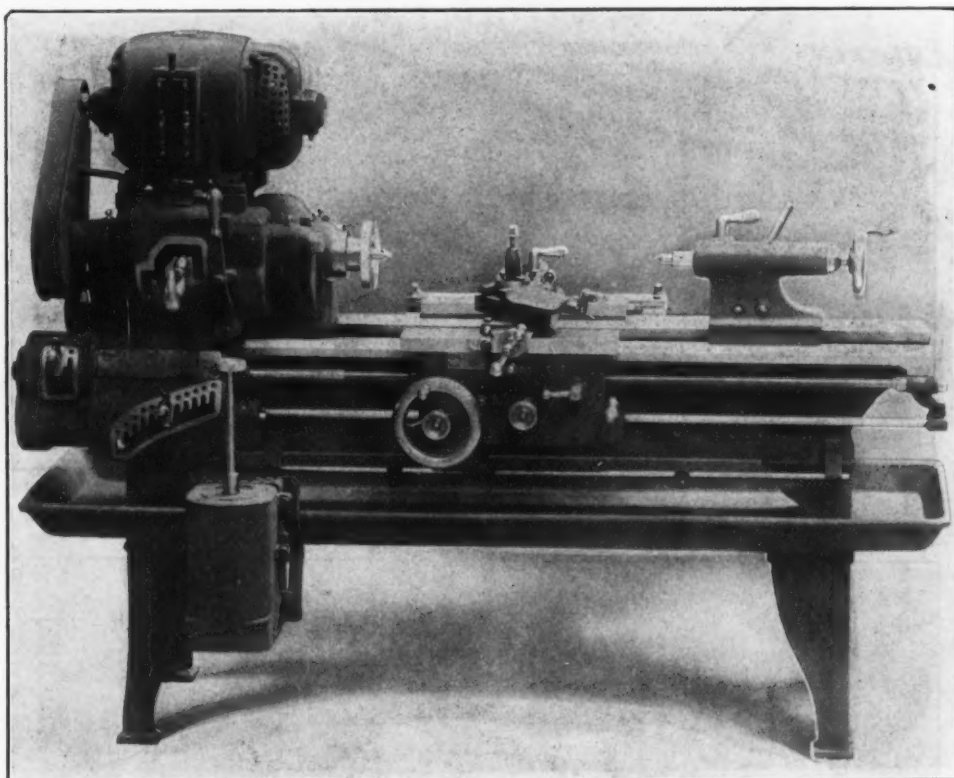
A 14-In. Motor Driven Hendey Lathe with Different Type of All-Geared Head.
